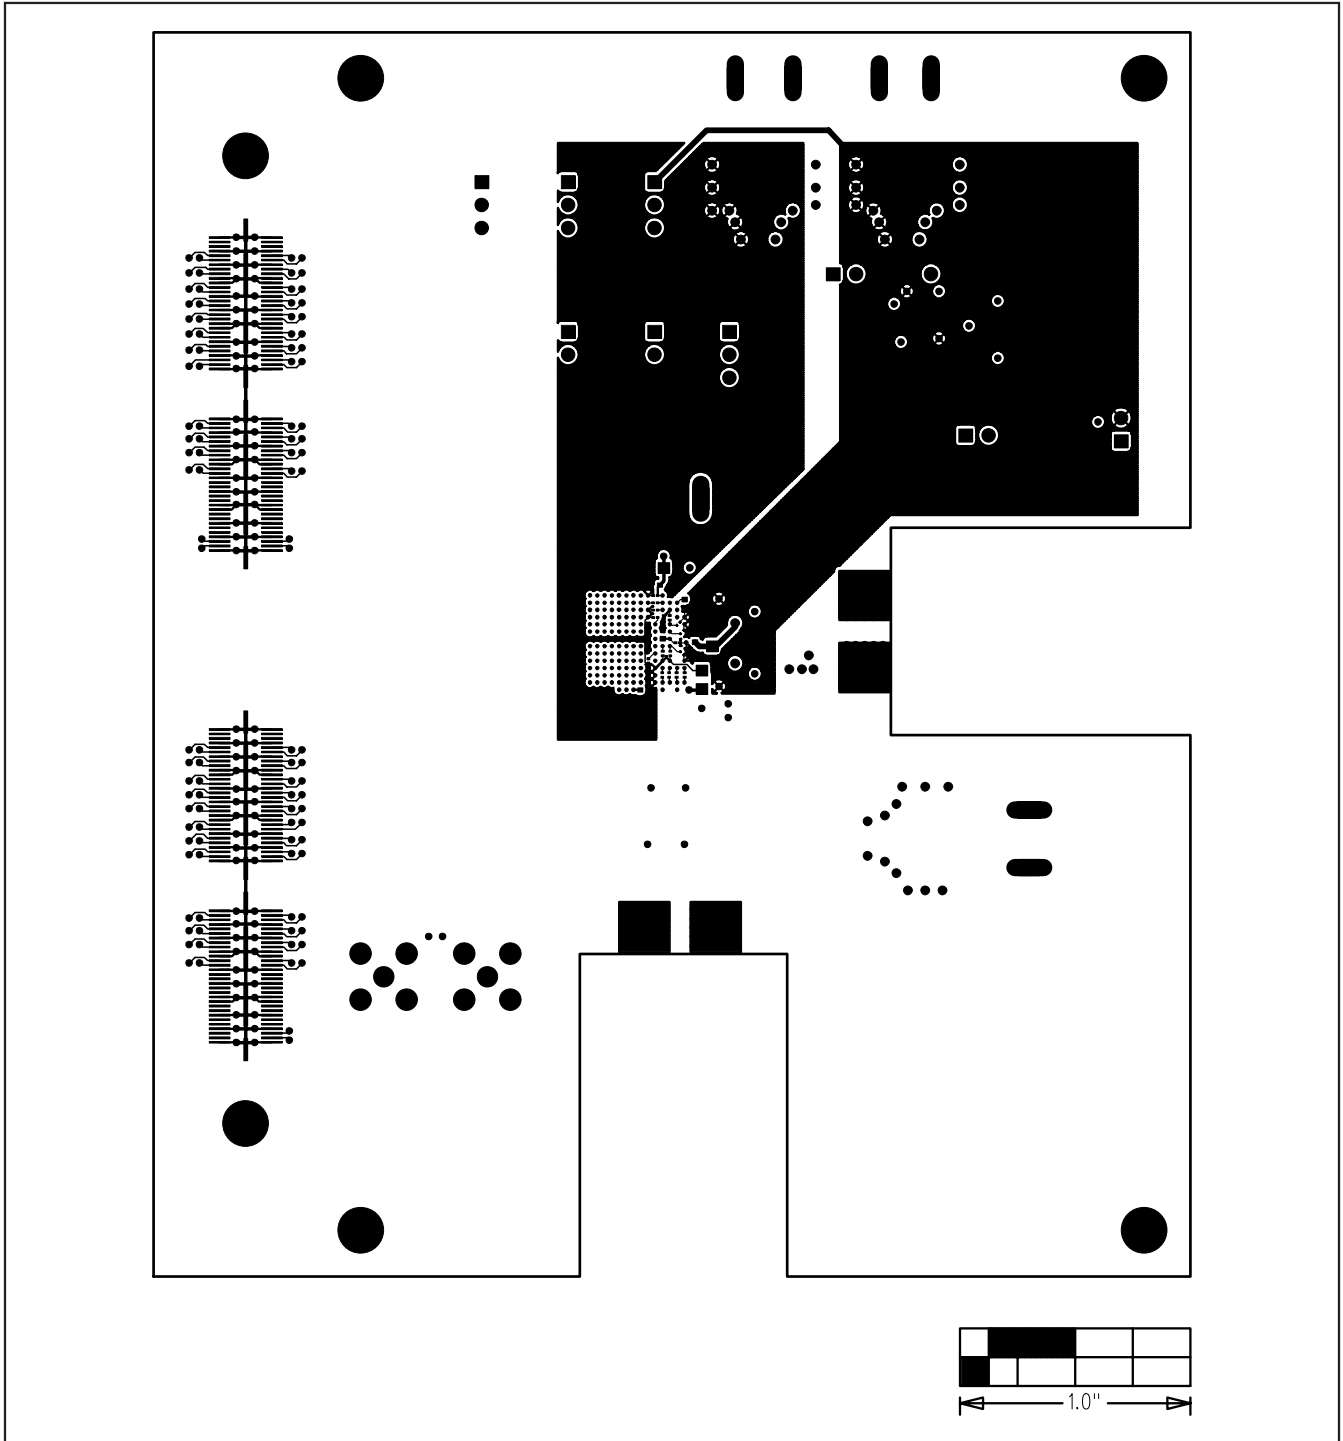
MAX19692/MAX19693 EV Kit PCB Layout—Solder Side
